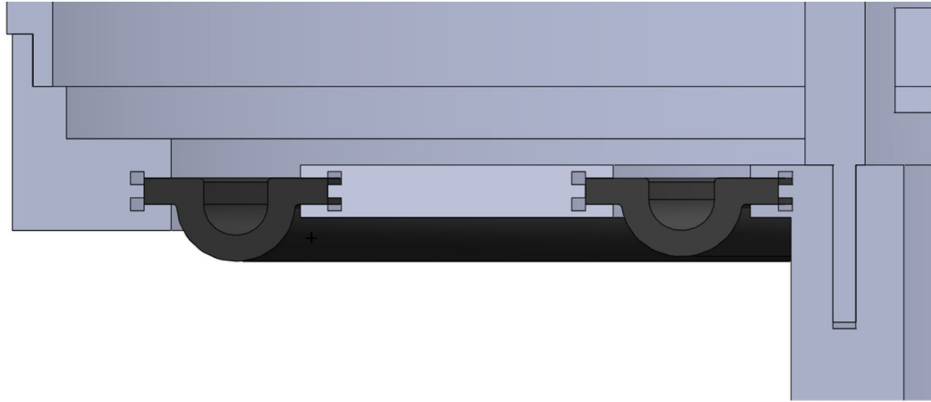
Final Passive Radiator Design - Notches for Material Attachment
